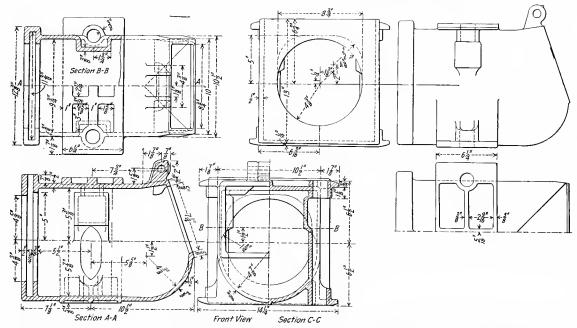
Cast Steel Journal Box for 6 in. by 11 in. Journals of Baltimore & Ohio 70-Ton Capacity Freight Car. Buckeye Steel Castings Company.
